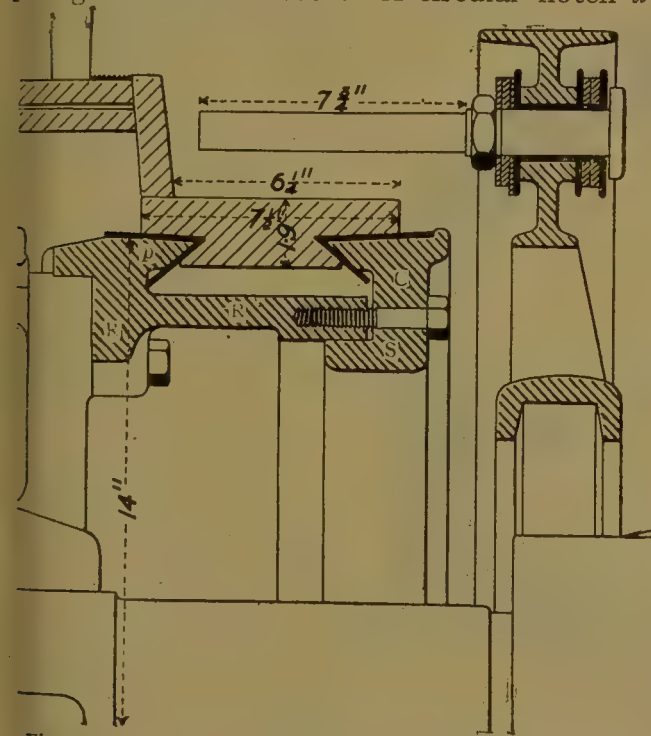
Multipolar Commutator of the International Electrical Engineering Co.
